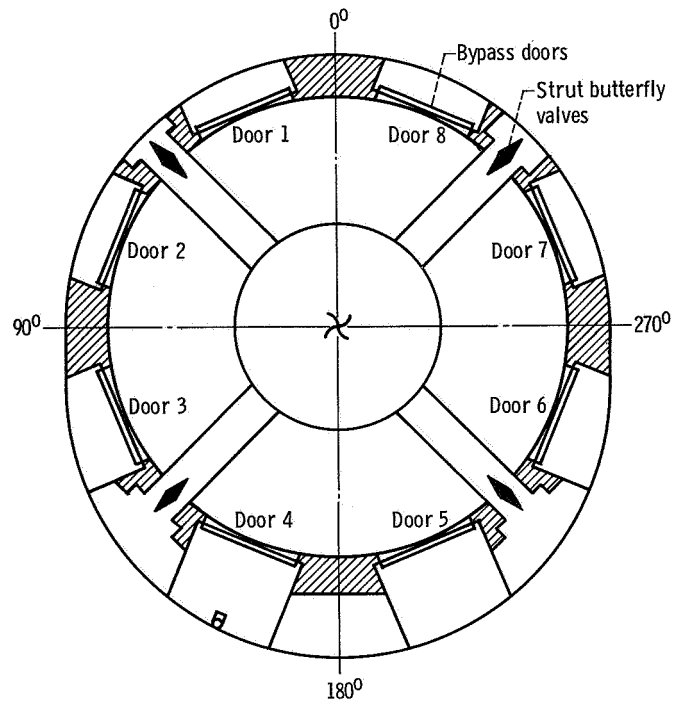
View of inlet looking downstream showing bypass door and centerbody bleed flow struts.
